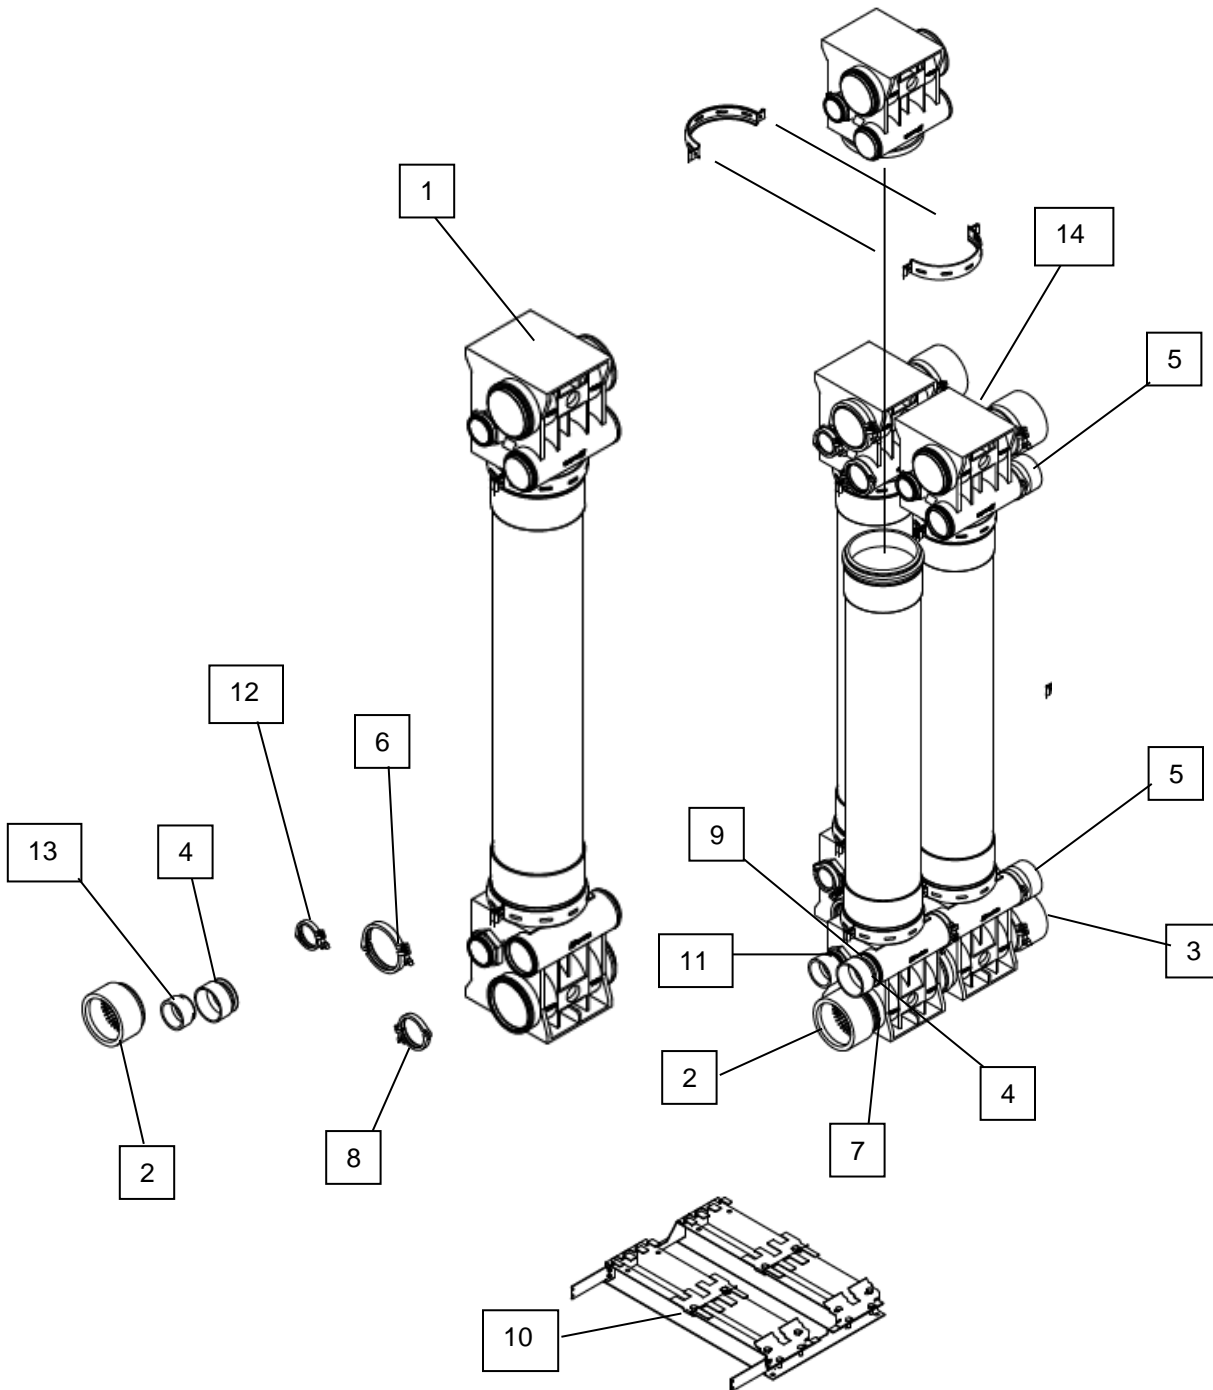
Image shows an exploded view of our 2 x 2 HYDRAcube.
